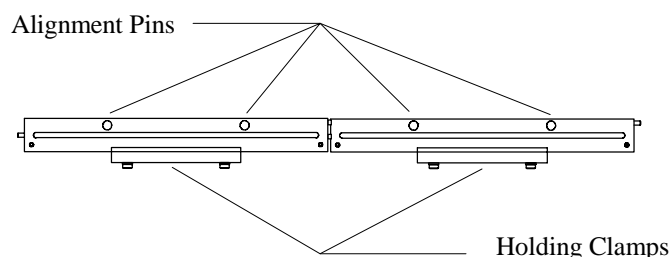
X-Ray Alignment Fixture (010-0923)
